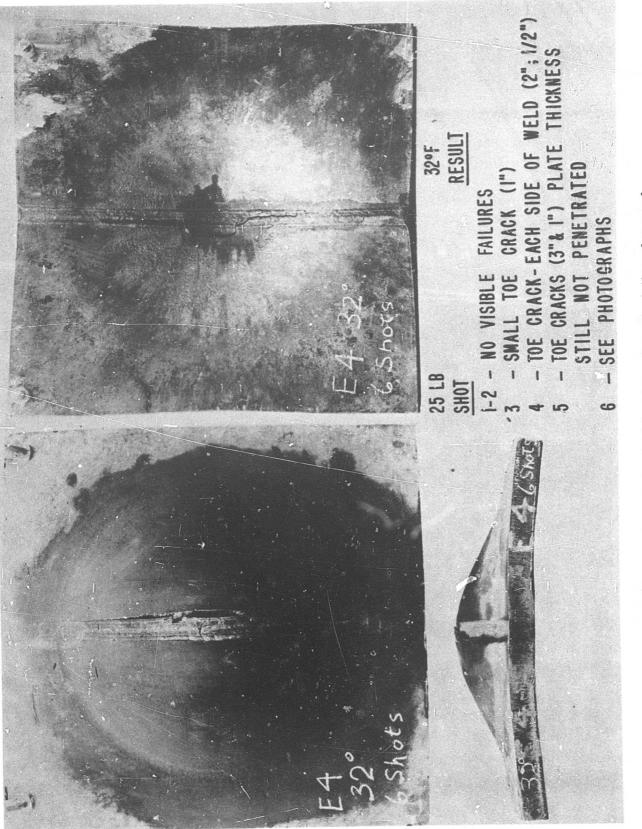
Explosion-bulge test fracture characteristics of manual Mil 11018 weldment of 2-in.-thick HY-80 steel
